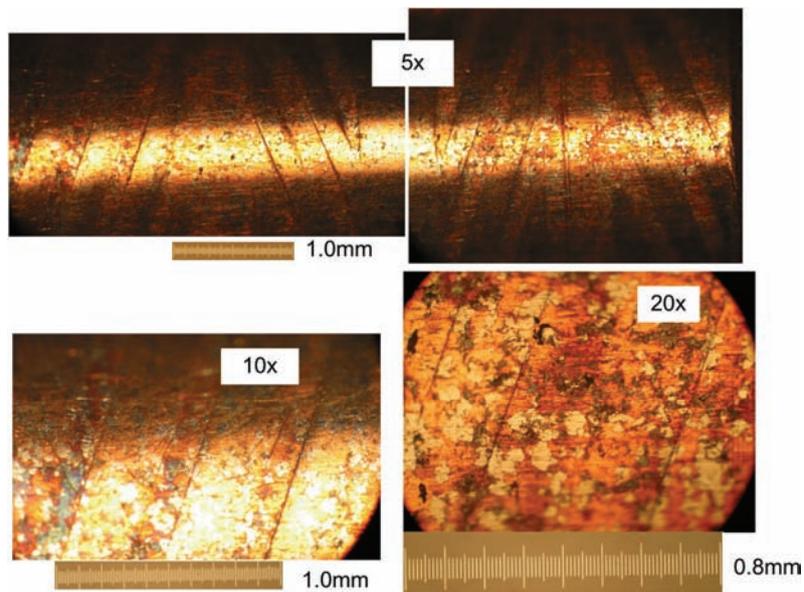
Bearing sleeve surface with micro-grooves - bearing from 3.5" HDD Seagate Barracuda ST380815AS
